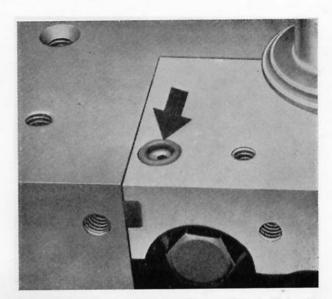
Showing the oil seal assembled to the front main bearing cap
